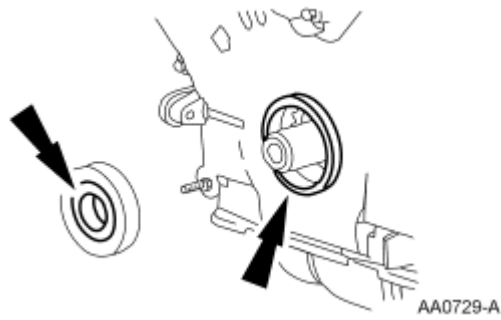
Lubricating Engine Front Cover And Crankshaft Front Seal Inner Lip
